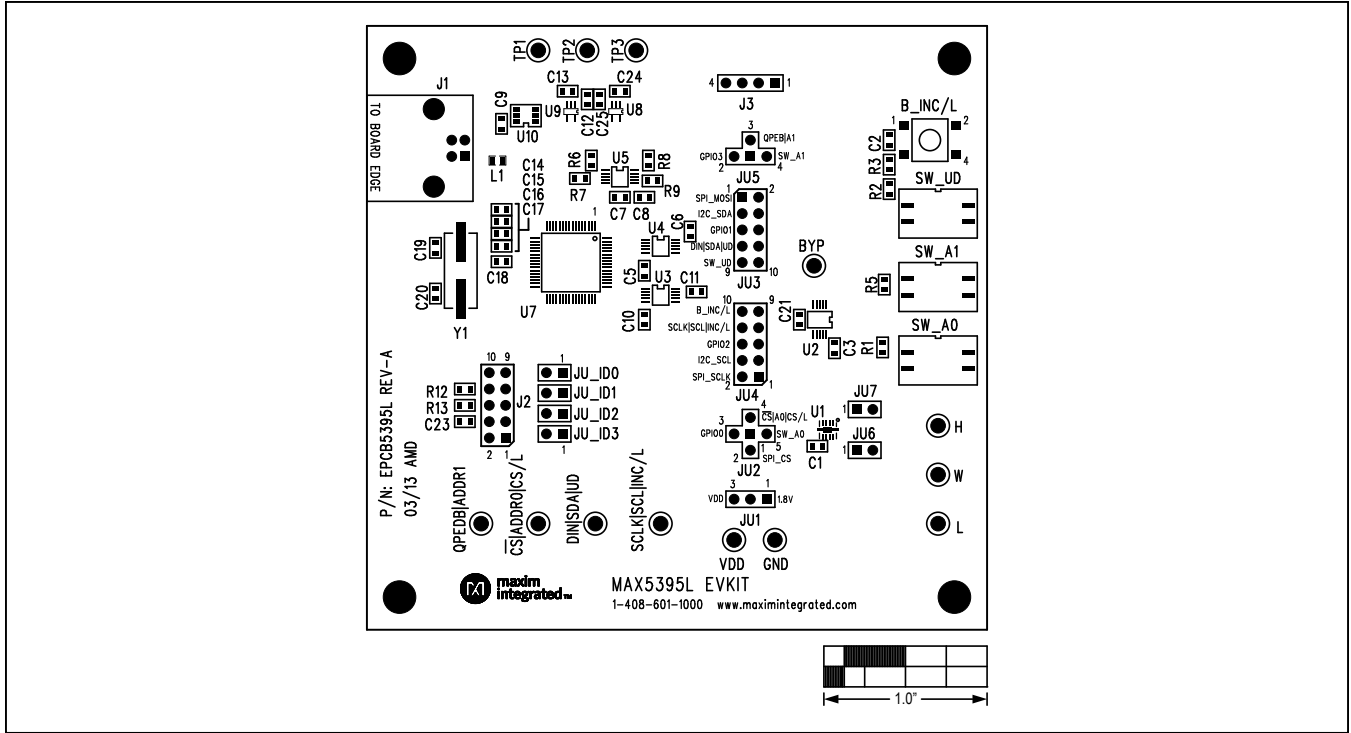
MAX5395L EV Kit Component Placement Guide—Component Side
